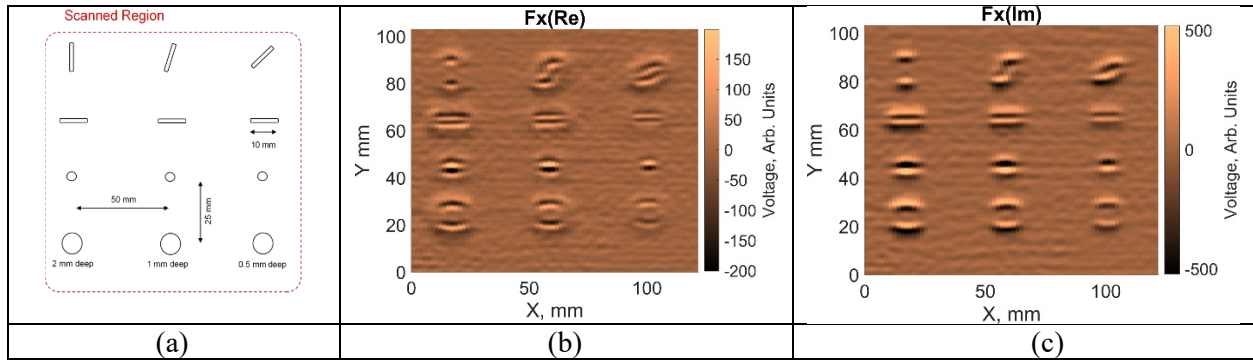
C-scan of the calibration CFRP sample using the sensor array E-2a, bottom side, $f = 2$ MHz in the SDD axial mode: (a) locations of defects; (b) x-gradient of the real part; (c) x-gradient of the imaginary part.
